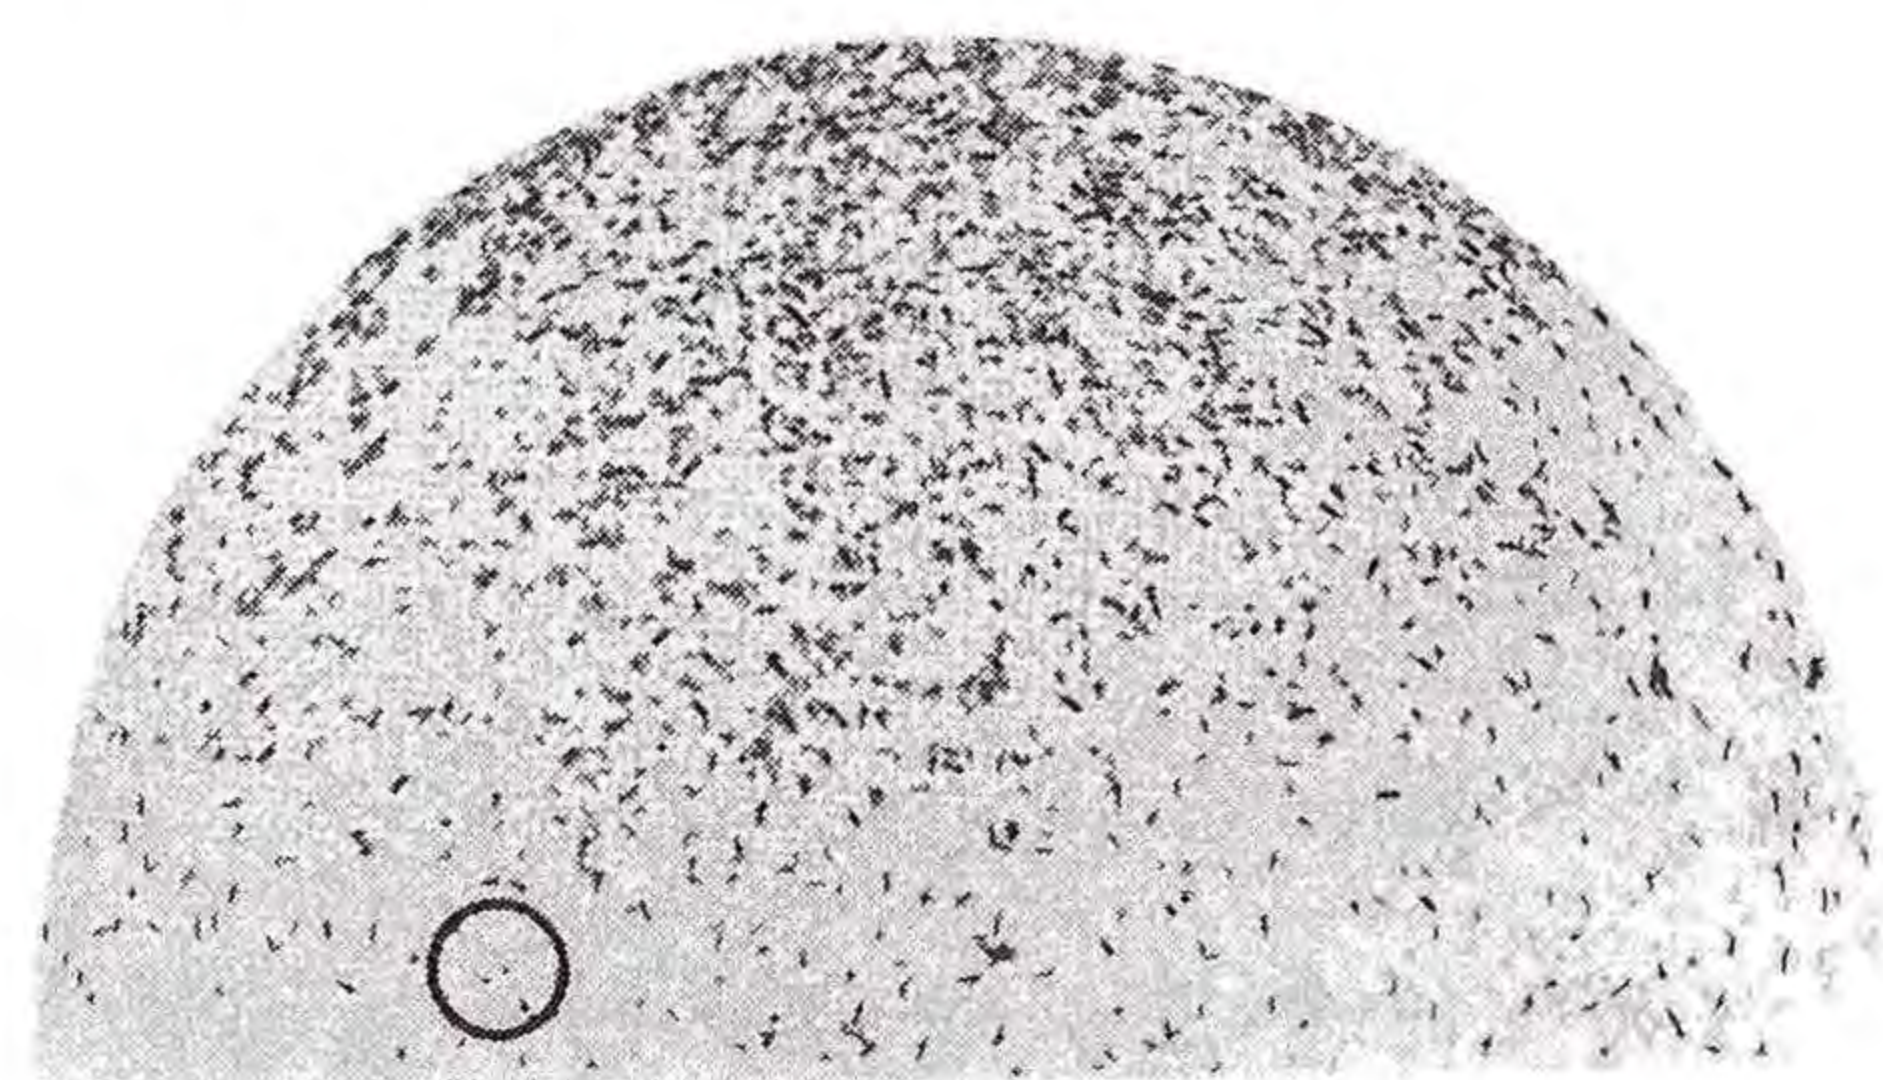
Soft X-ray photographs of injection molded test piece.
